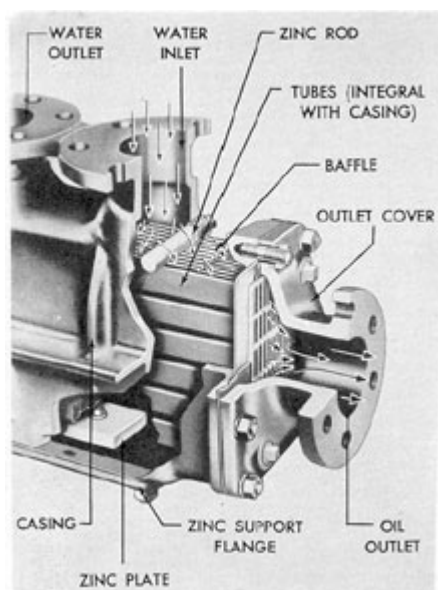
Cutaway of fresh water cooler, GM 8-268.
